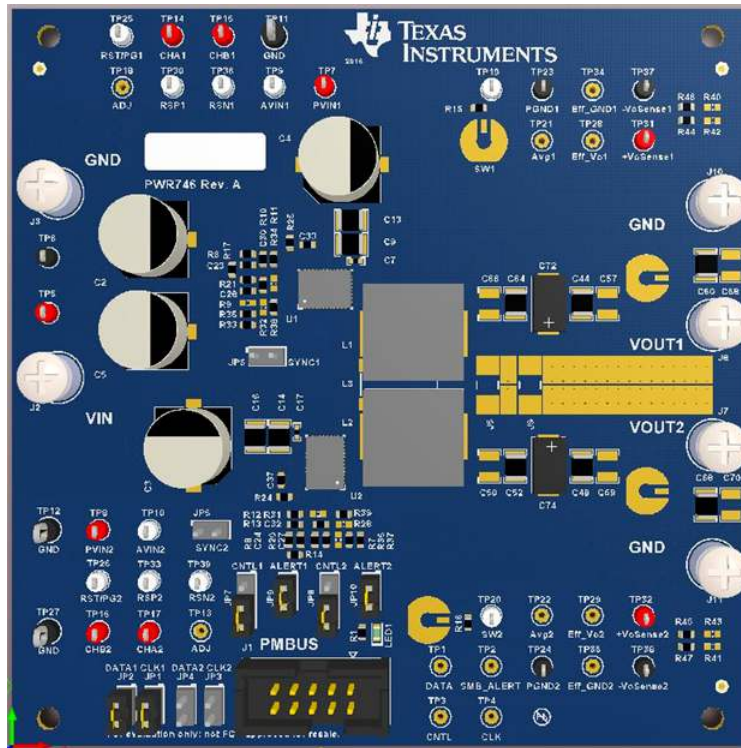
TPS546C20AEM1-746 EVM 3D Top View
